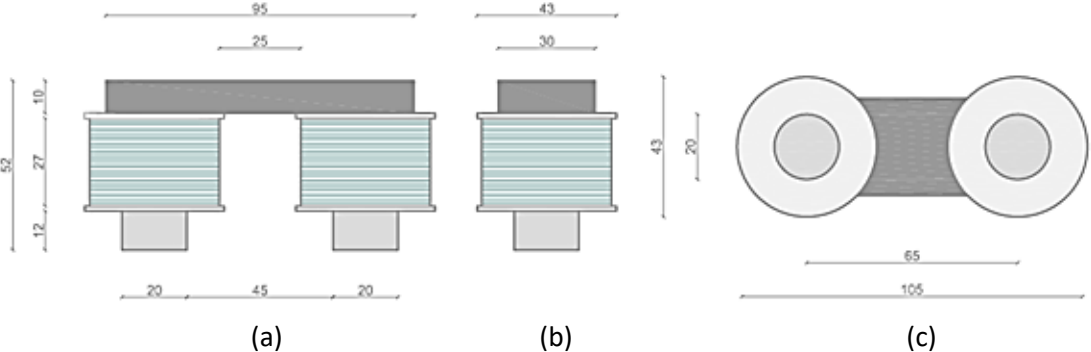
Design of the U-probe in units mm, a) front view, b) side view and c) bottom view.
